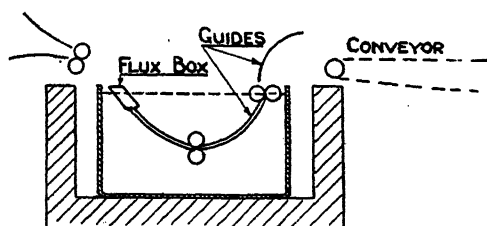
Diagram of the machine used in the zinc-coating of sheets [B 37].
